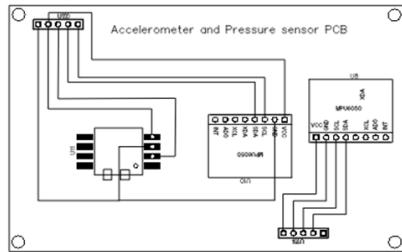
PCB 2 design used to mount accelerometer and pressure sensor.
